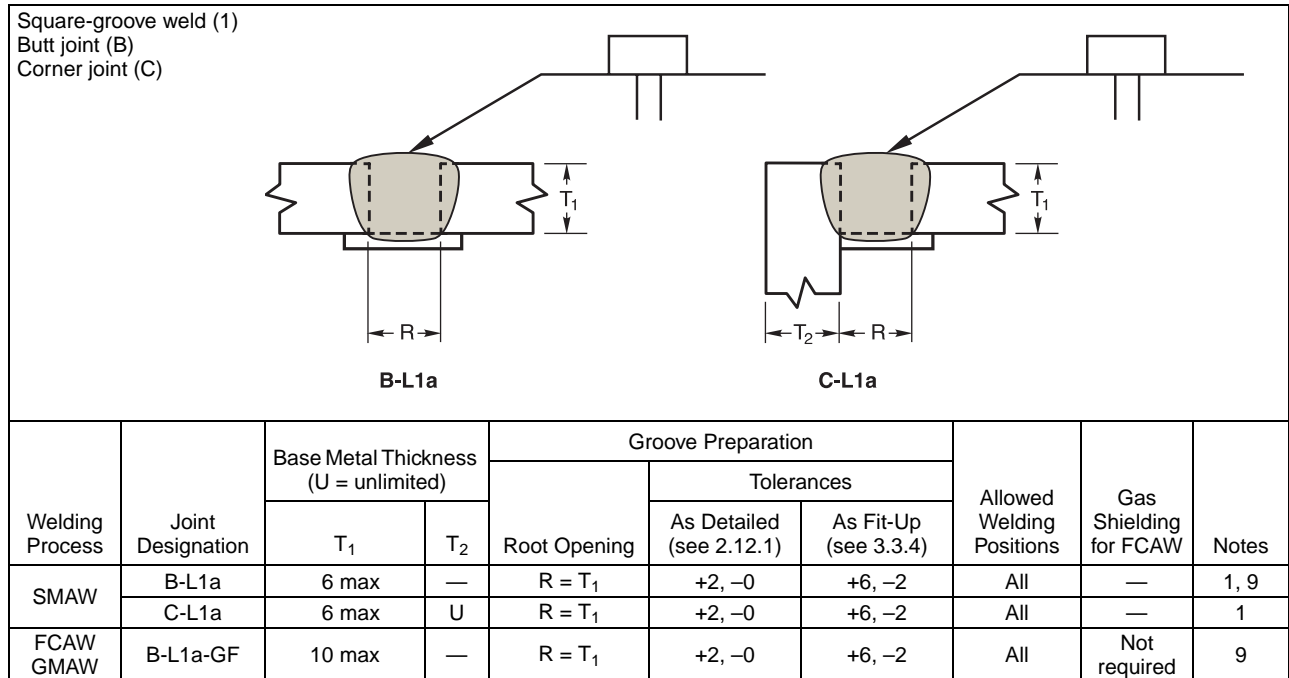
Details of Welded Joints for CJP Groove Welds (see 2.12.1) (Dimensions in Millimeters)
